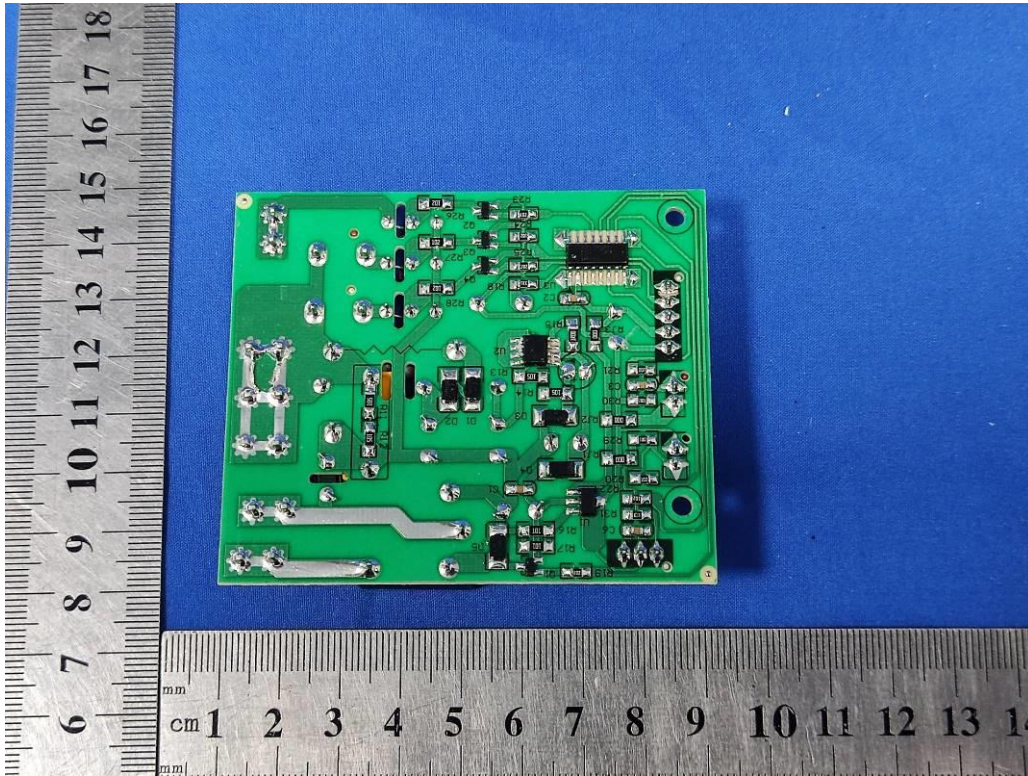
Main PCB view (4700 GENSE, CM1670A)
